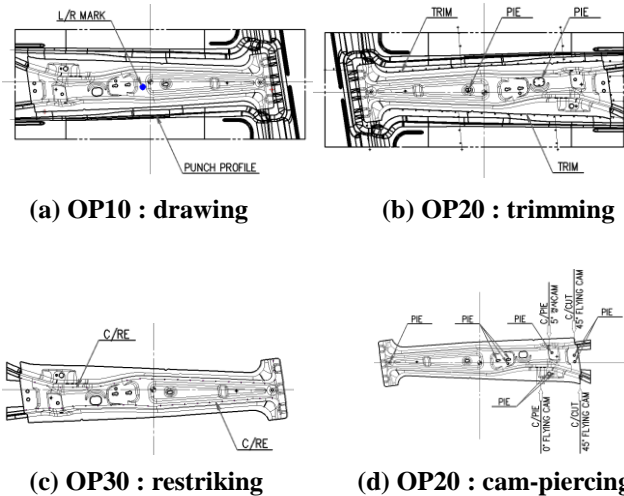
Schematic layout of the manufacturing process of the center pillar
